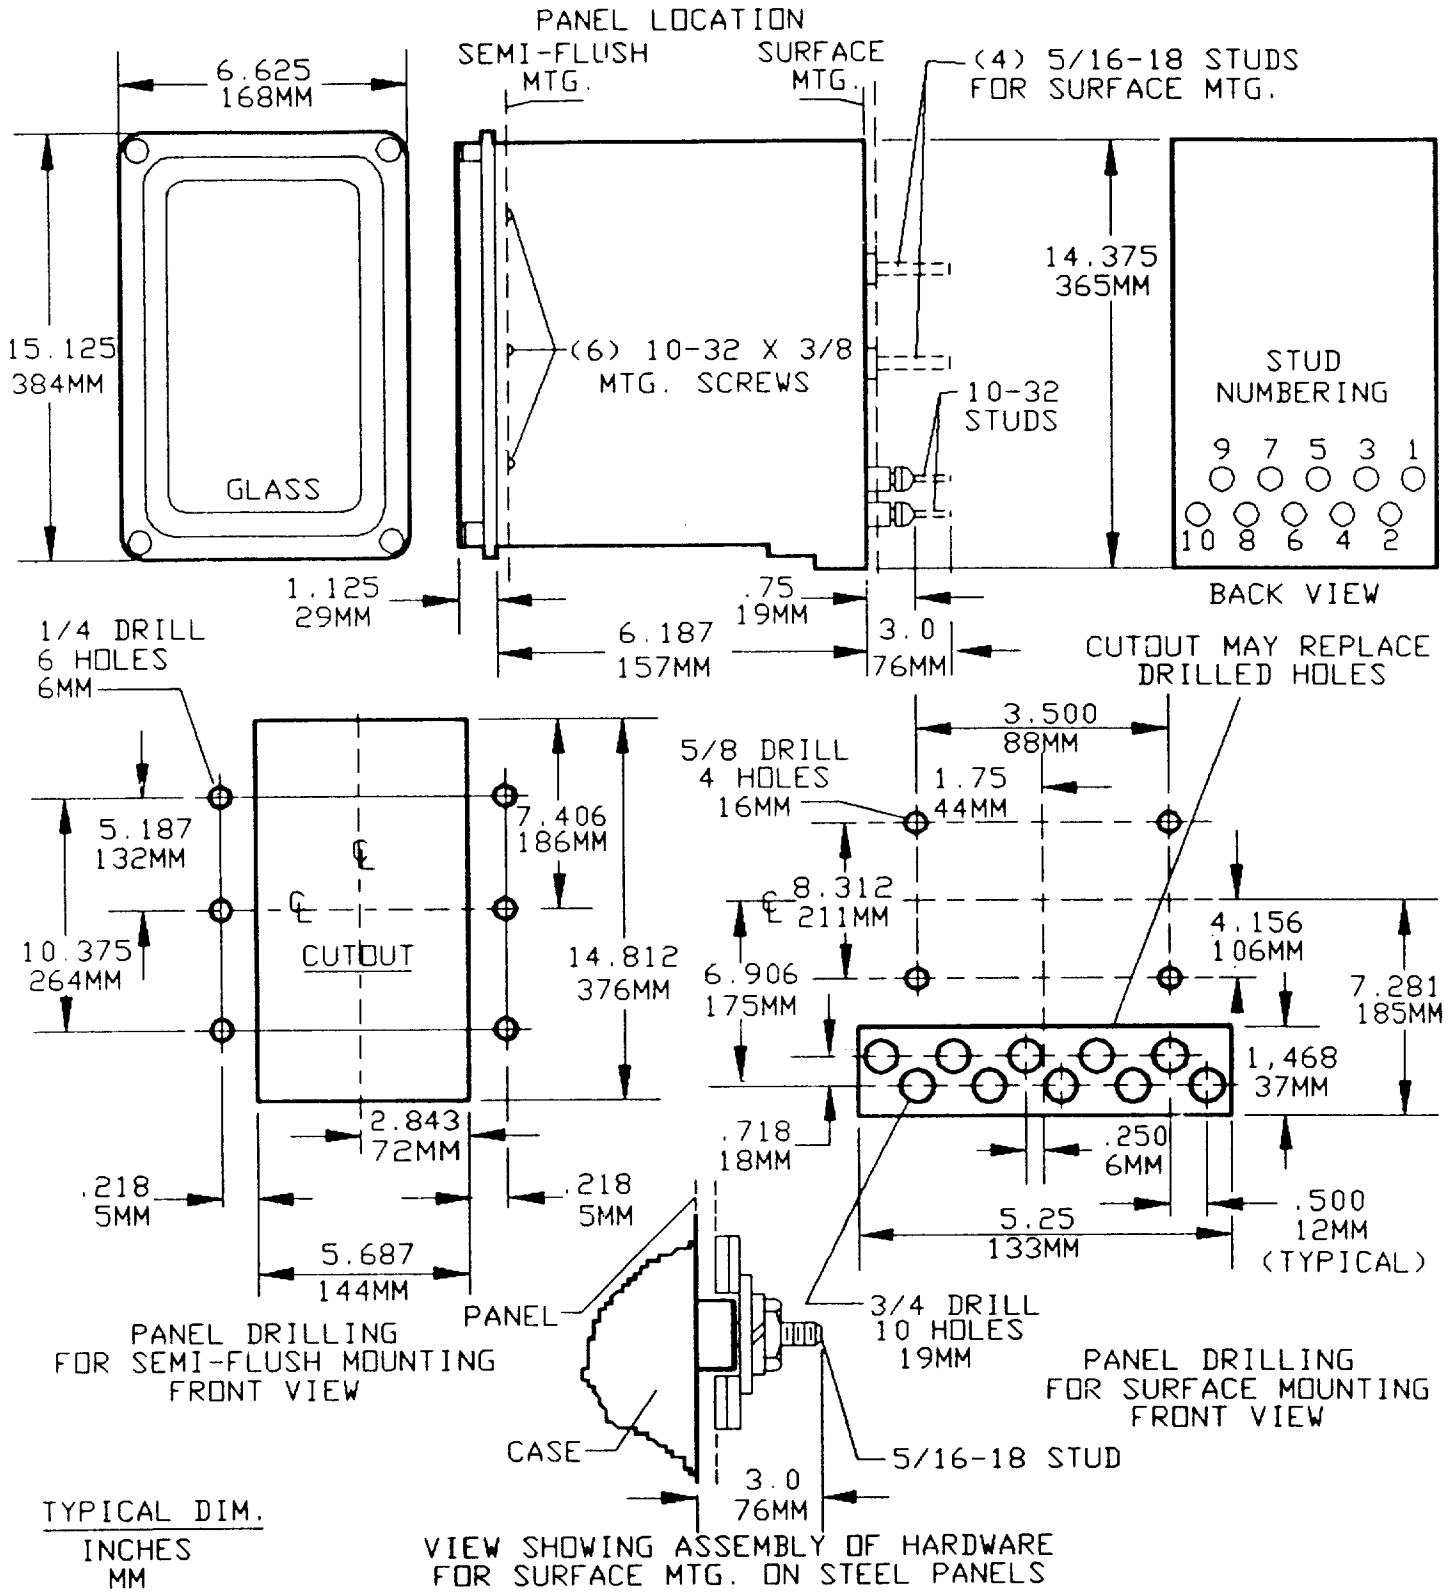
(K-6209273 [5]) Outline and Panel Drilling Dimensions Diagram for the Type CJC15M Relay
